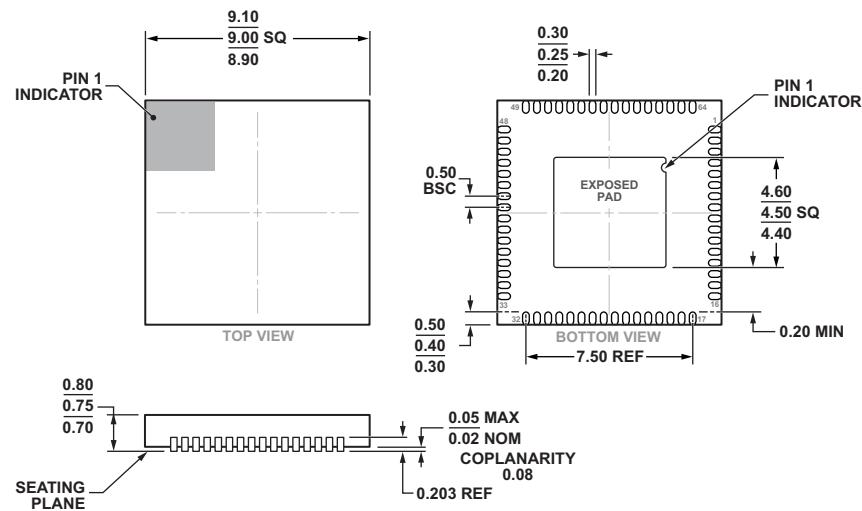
64-Lead Frame Chip Scale Package [LFCSP]
